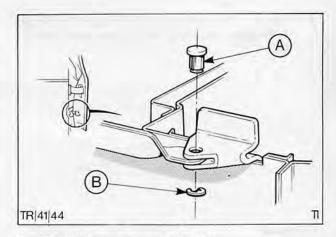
Check arm clevis pin and retainer A – Clevis pin B – Circlip
